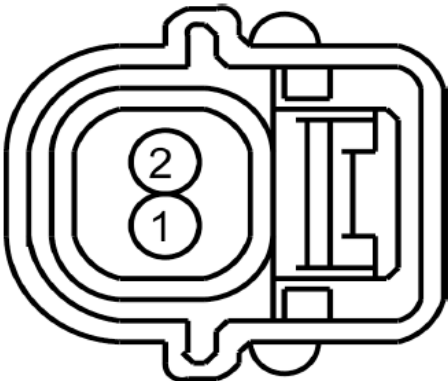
Heated Oxygen Sensor 21 Connector End View (C1572)
